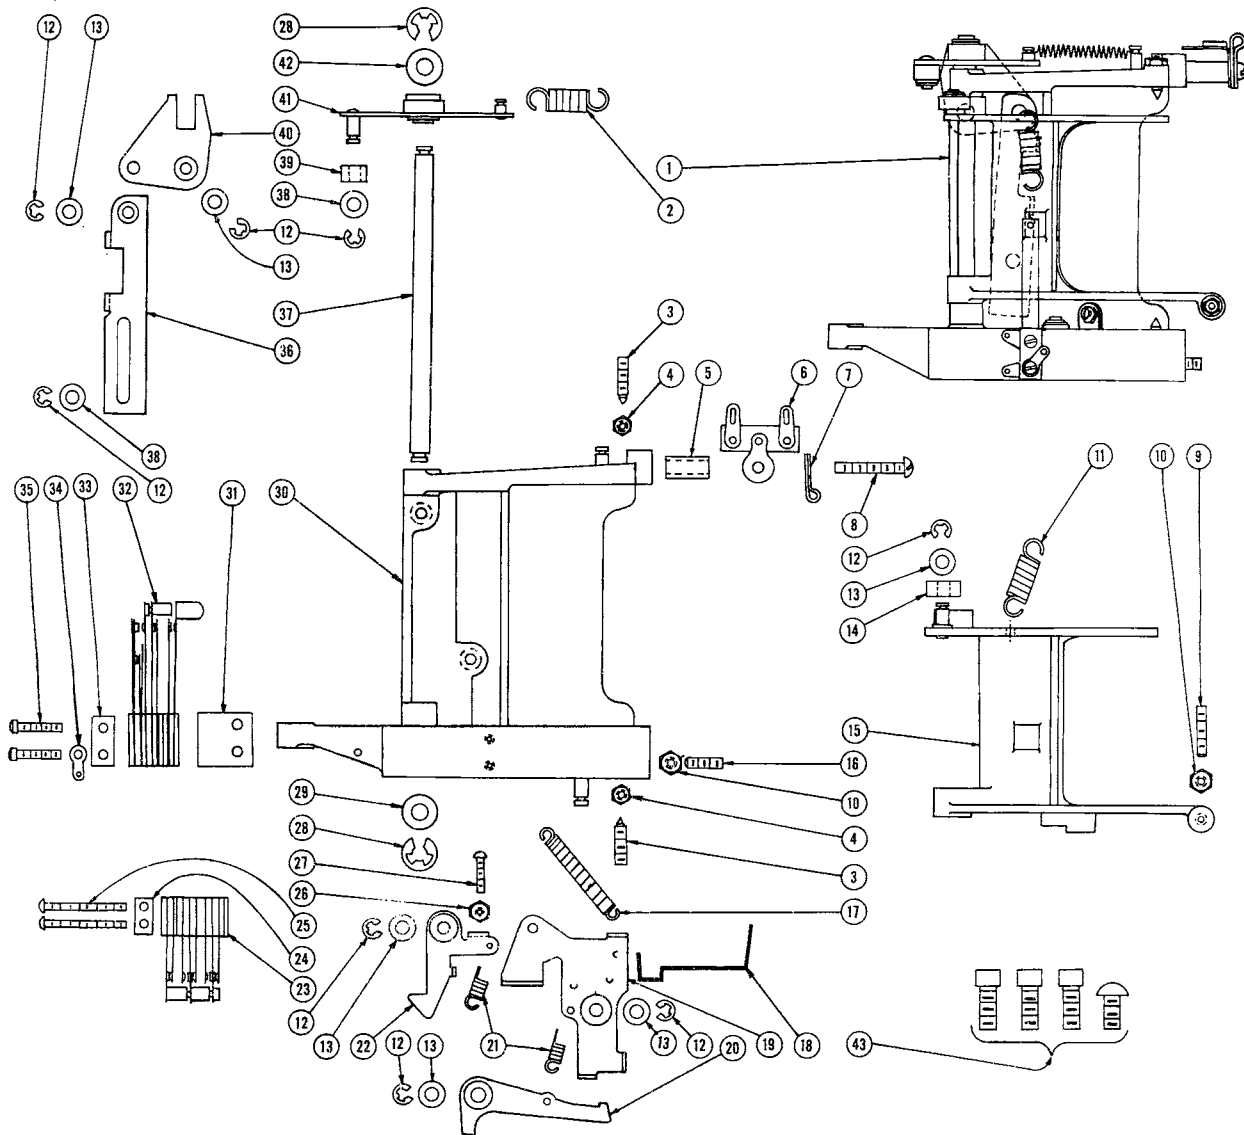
PICKUP ARM BEARING BRACKET ASSEMBLY
